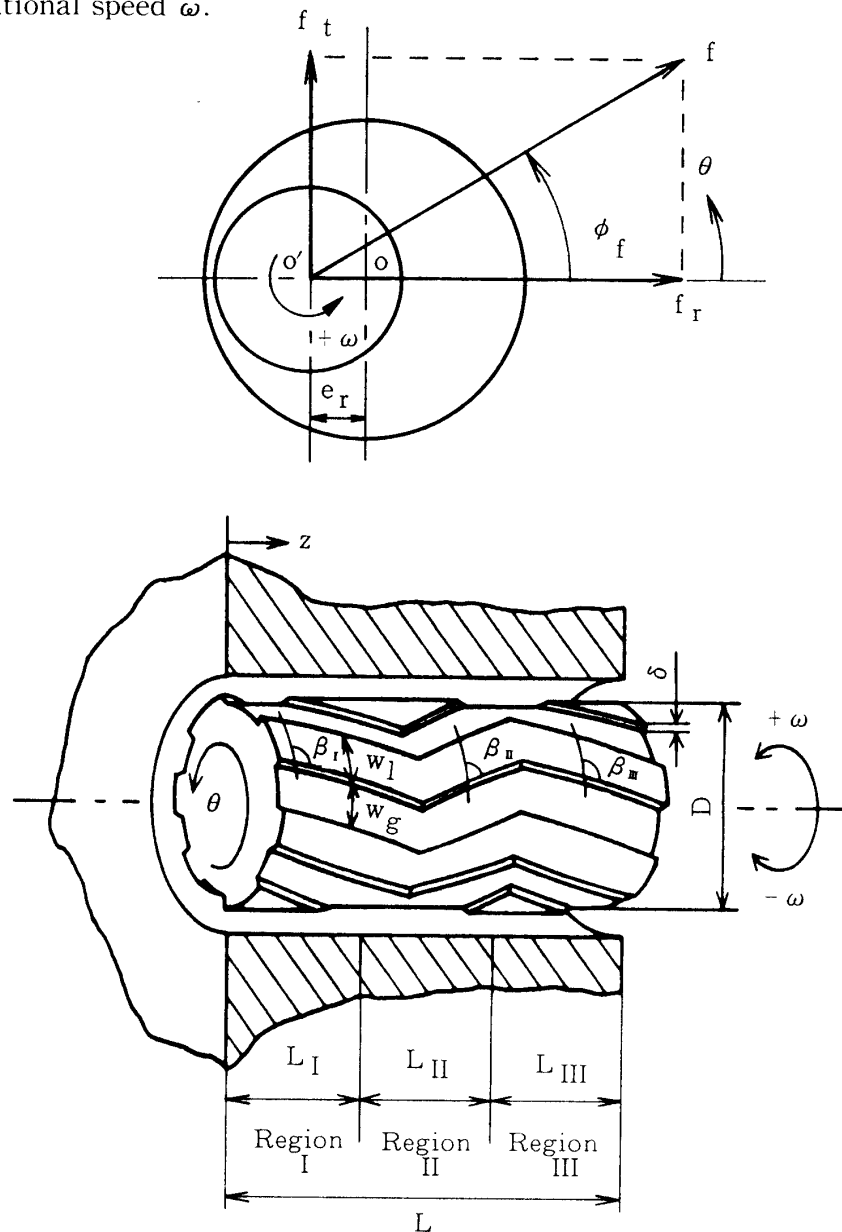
The reversible rotation type herringbone grooved journal bearing.
